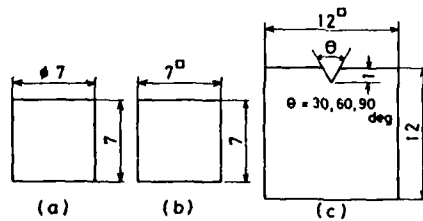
Configurations of (a,b) specimens and (c) V-grooved tool
